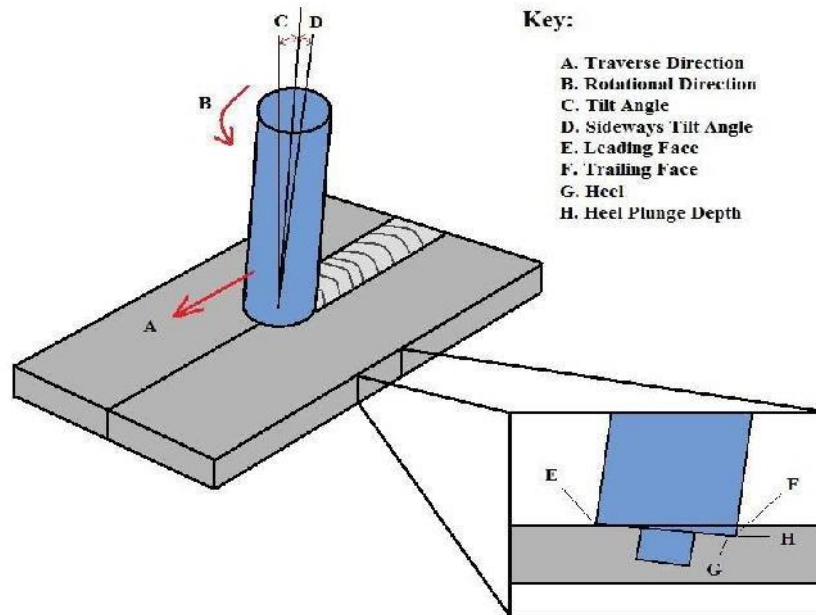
Diagram of FSW Tool Terms (Threadgill, 2007)
